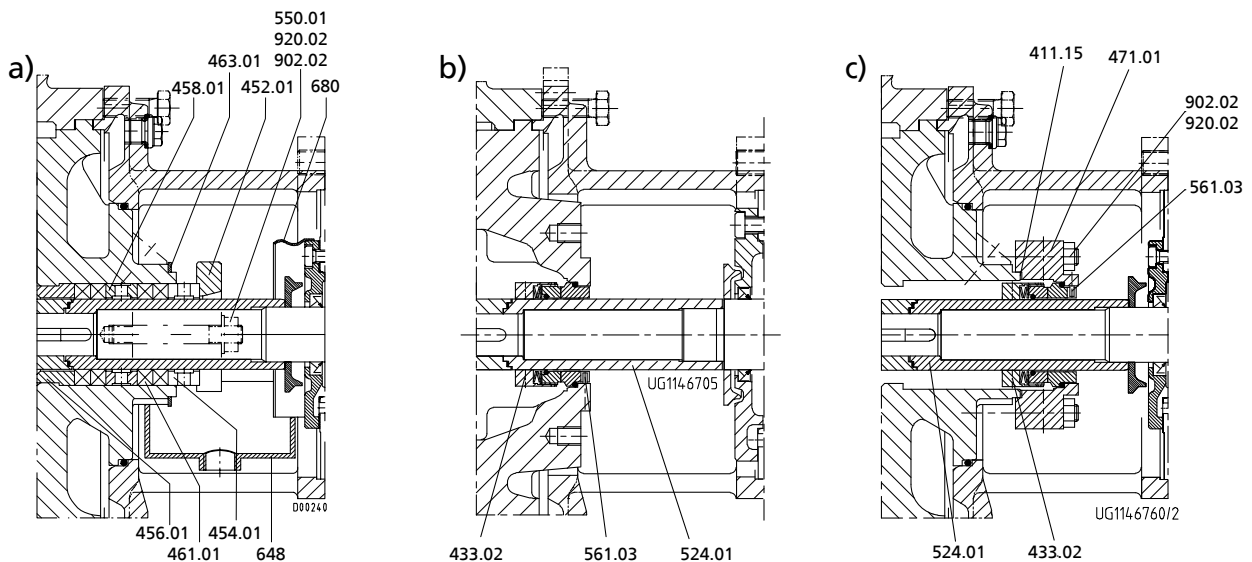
a) Version with gland packing, b) Mechanical seal with conical casing cover, c) Mechanical seal with cylindrical casing cover
